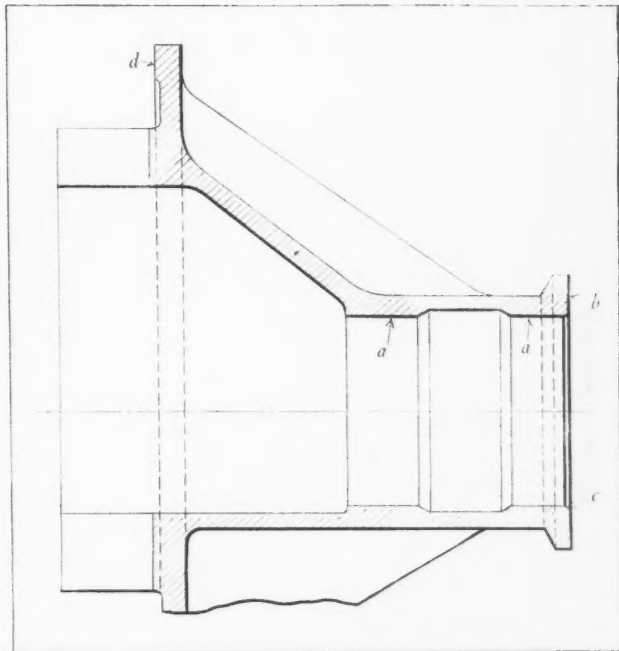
Axle Drive-pinion Carrier Bored, Faced, and Reamed by the Tools Shown in Figs. 5 and 7
